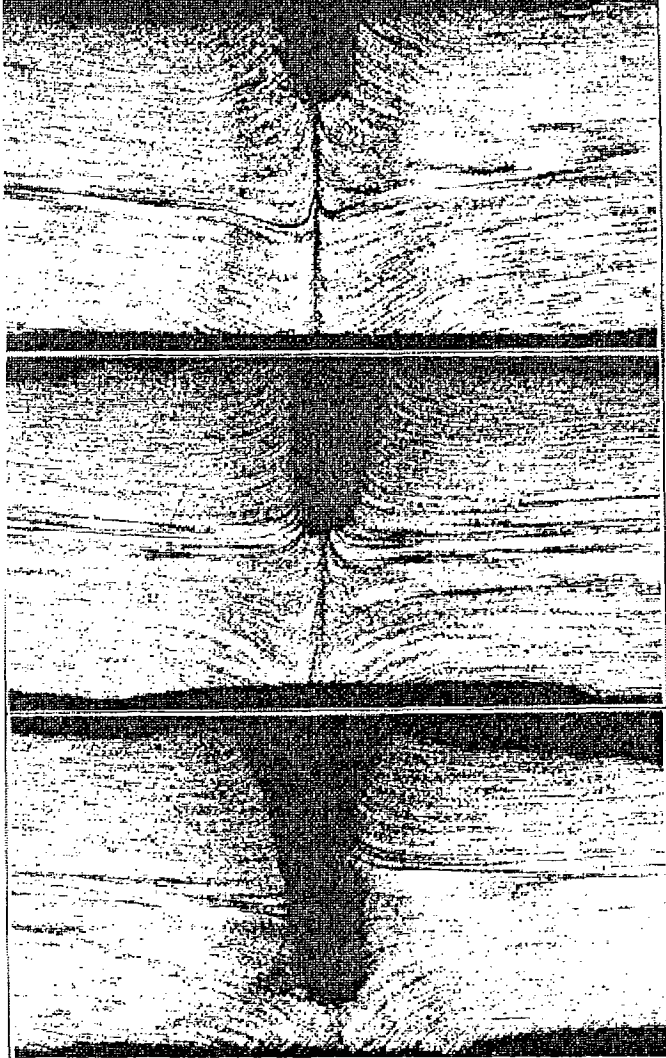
Cross sectional view of corroded ERW carbon steel pipe etched in Picral showing groove and metal flow.
